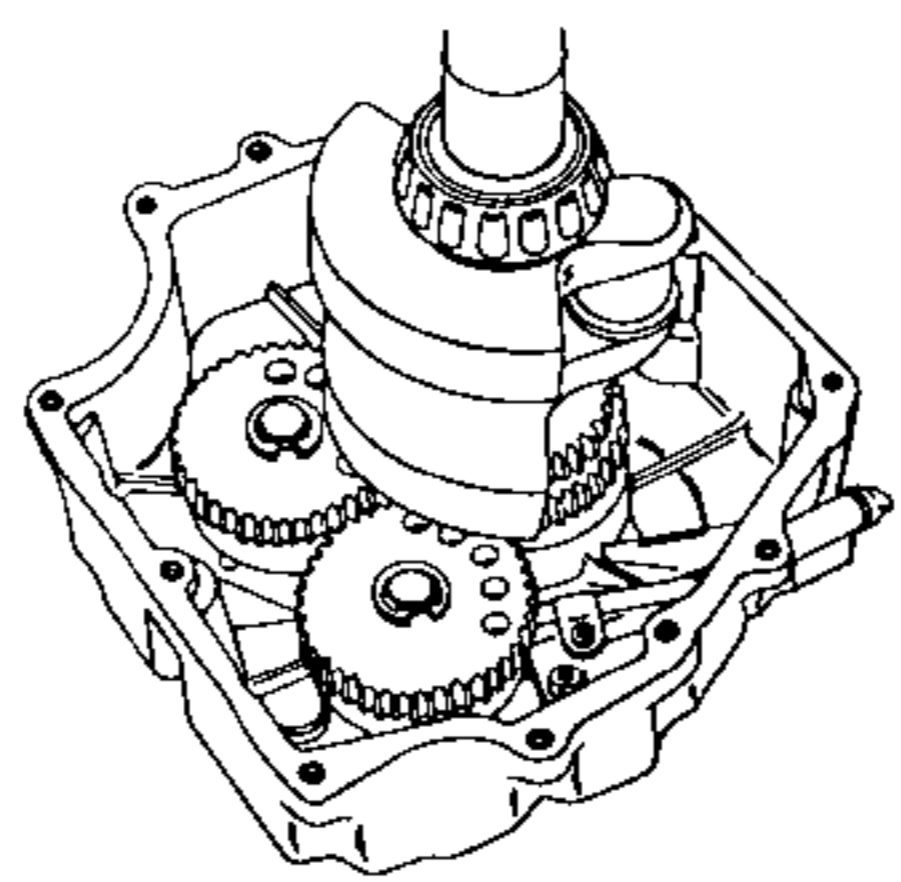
View showing Dyna-Static balancer gears installed in Model HH80, HH100 or HH120 crankcase cover. Note gear retaining snap rings.
